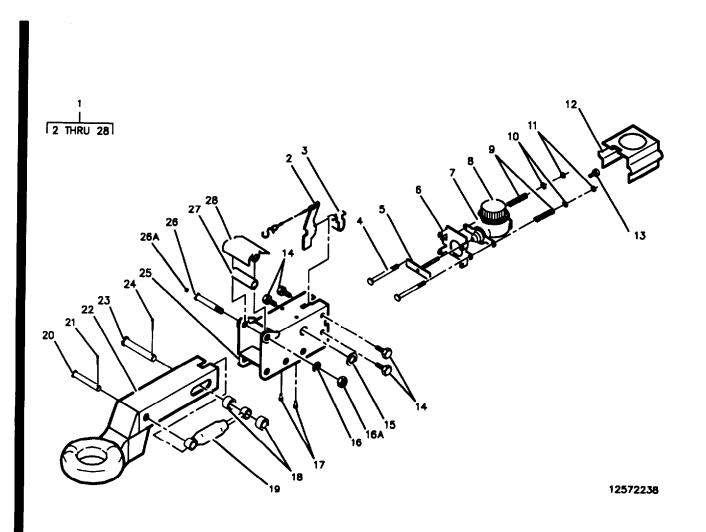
Brake Actuator Assembly (Sheet 1 of 2)
